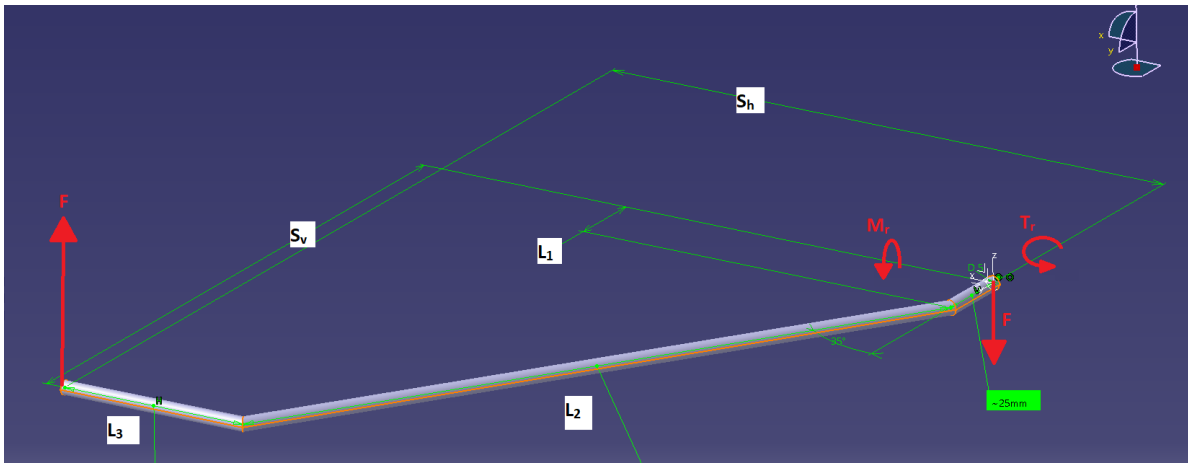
Isometric view of The cantilever beam model with dimensions, this beam will be split up into 3 sections as depicted in Figure 11.3
